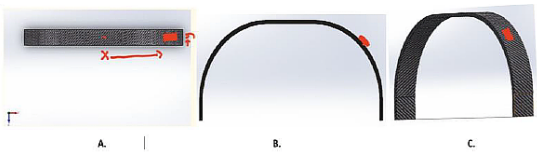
Sensor installation position on the landing gear: a) top view, b) front view, c) side view.
